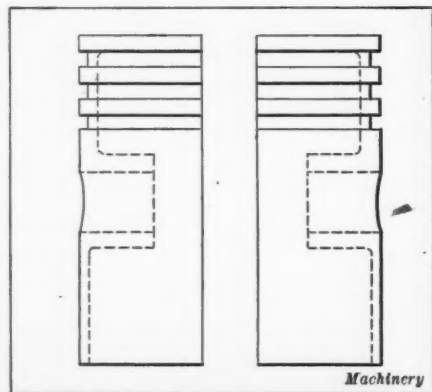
Old Piston split ready for Use as a Core Box in casting New Piston
